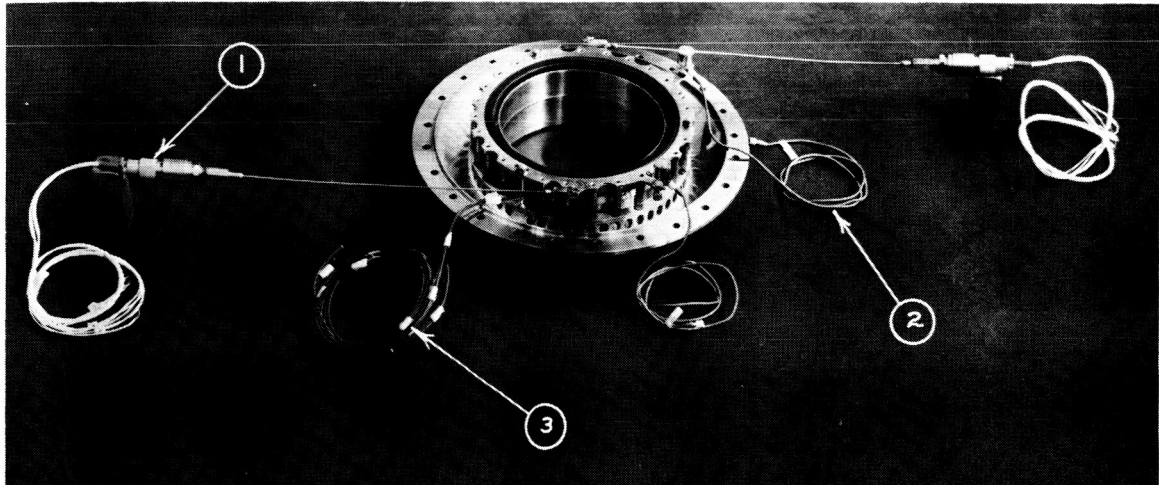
Rubbing-Contact Face Seal with Piston-Ring Secondary Seal
